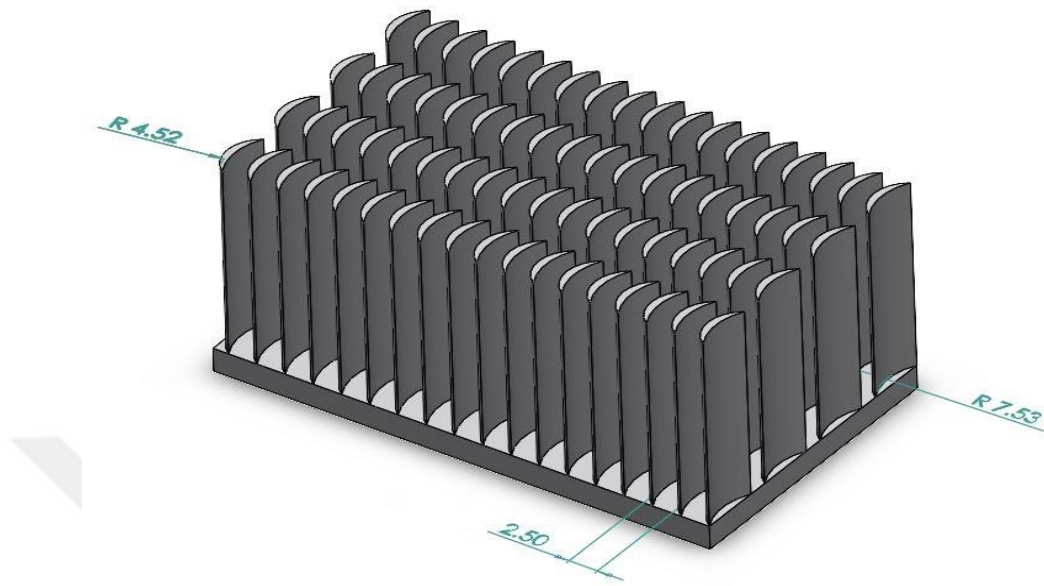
The CAD design of separated short airfoil fins heat sink
